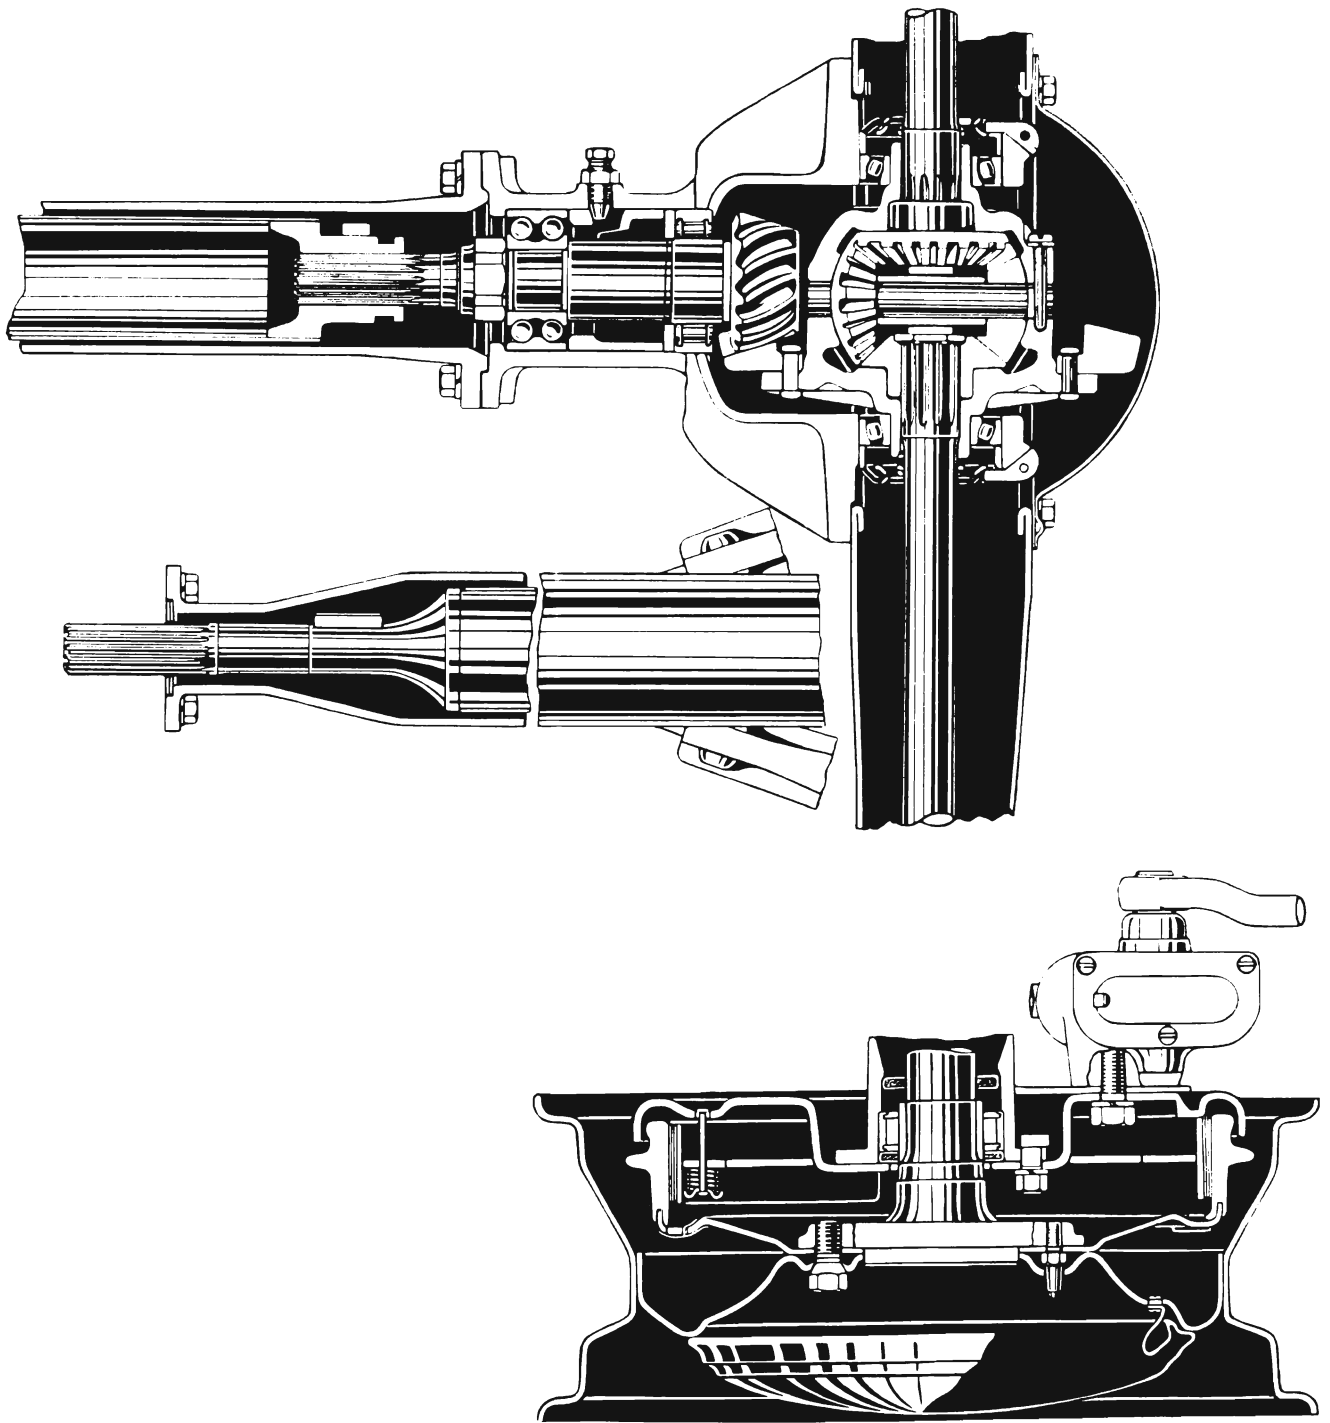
Rear Axle Assembly—Series 40-50-60-70
